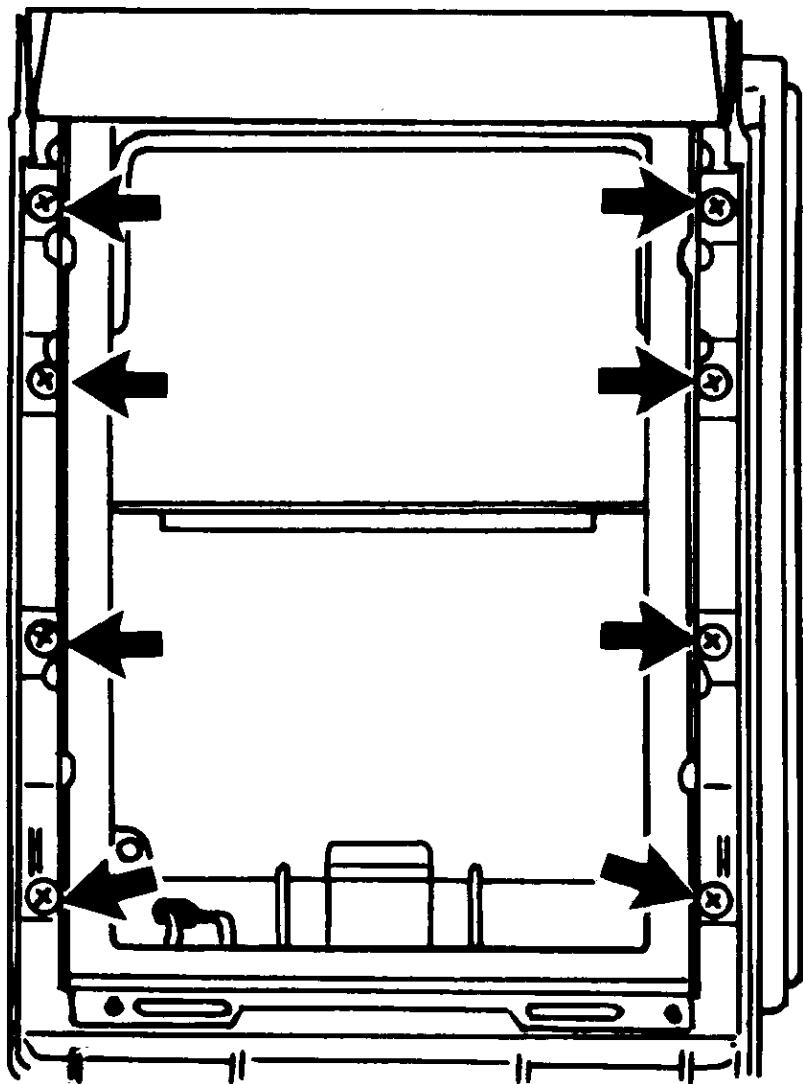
Removing Base Slide Spacer Assembly Screws
